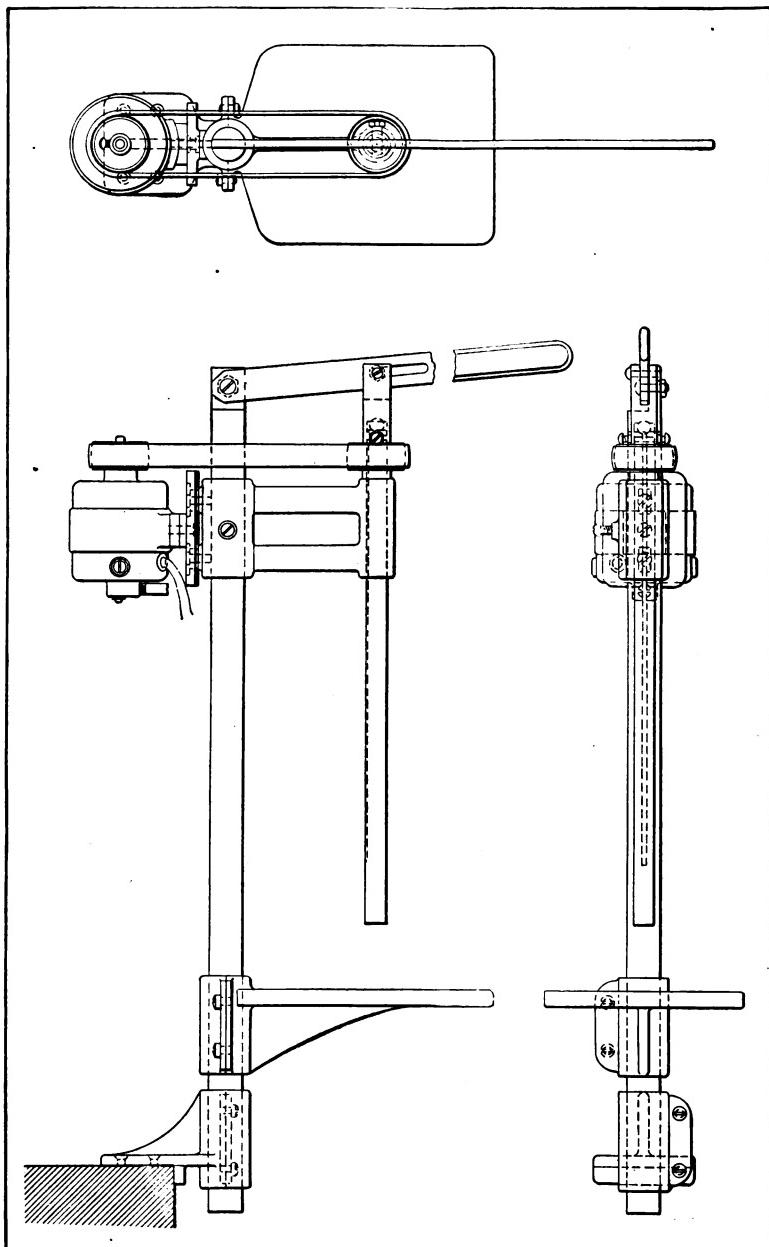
A—Assembly drawing of the bench drill described in this chapter
